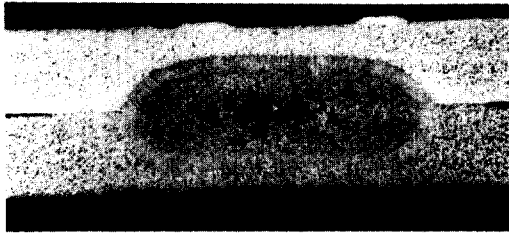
Damage of electrode depending on number of welds in 3-phase direct current welding of KS 5154 alloy. (CuCrZr Electrode, R=100mm, Electrode force=4.0kN, Welding time=120msec, Welding current=30.0kA)
